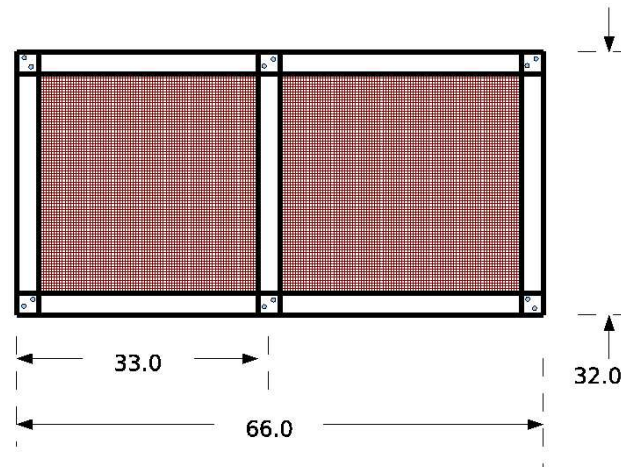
Mechanical drawing of the top (lid) of the enclosure.
